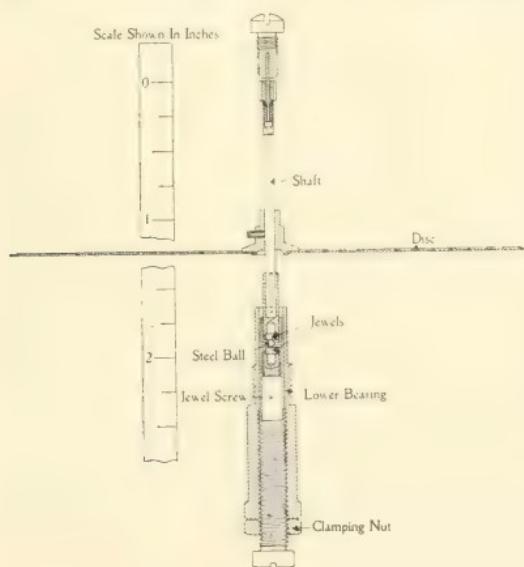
DETAILS OF BEARING AND CORRUGATED DISC
